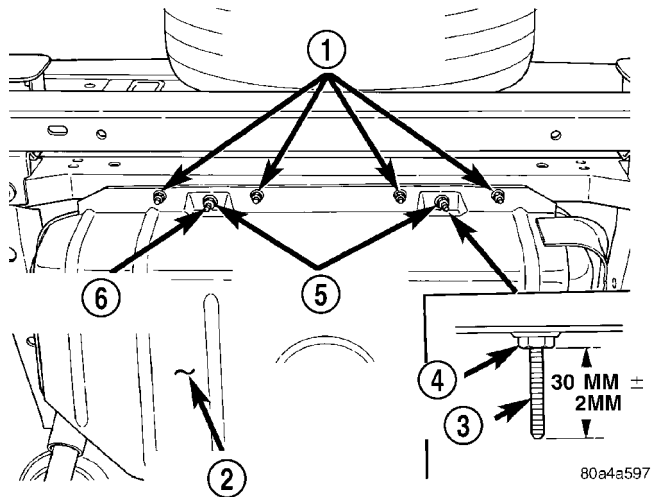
FUEL TANK MOUNTING NUTS - REAR
